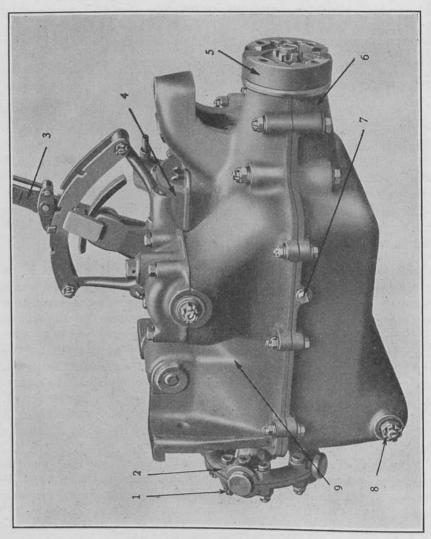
RIGHT SIDE OF TRANSMISSION	Name Drive shaft trunnion, fron Universal joint toggle. Change gear lever. Tire pump frame.		ring grase retainer. Transmission case, lower half. Reverse shifter lever shaft. Reverse shifter lever, upper half.
